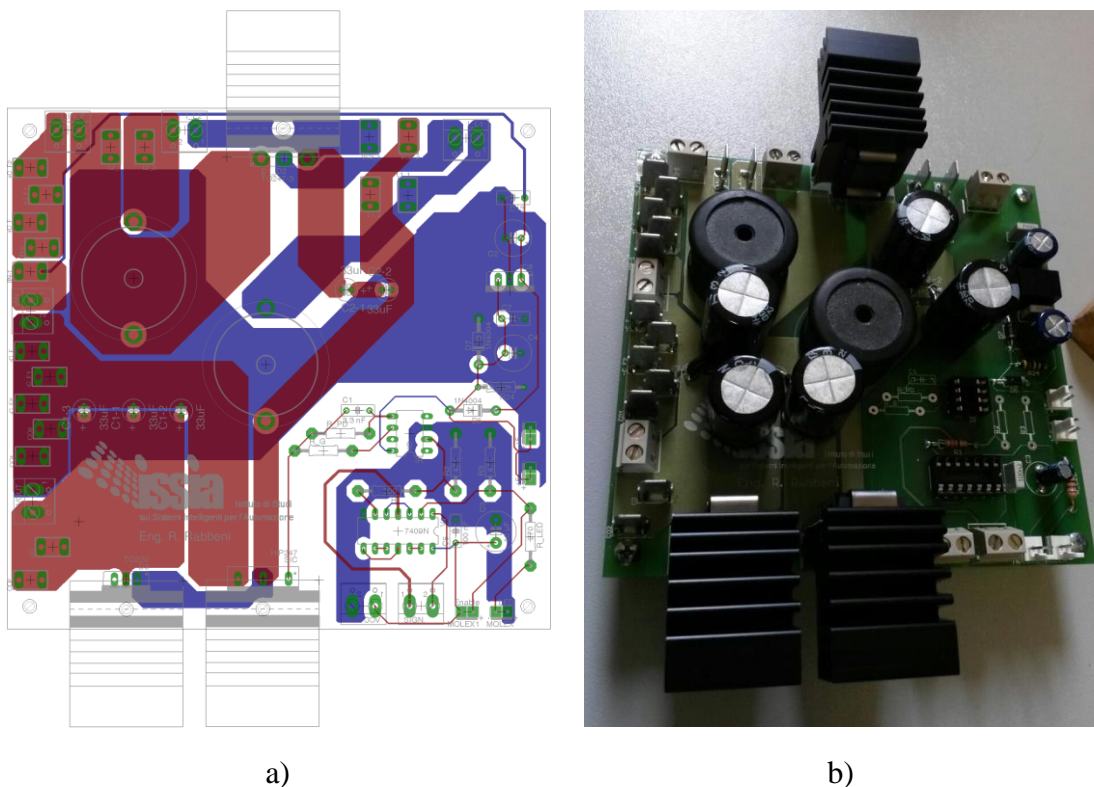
QBC2 prototype: a) PCB layout; b) PCB board.
